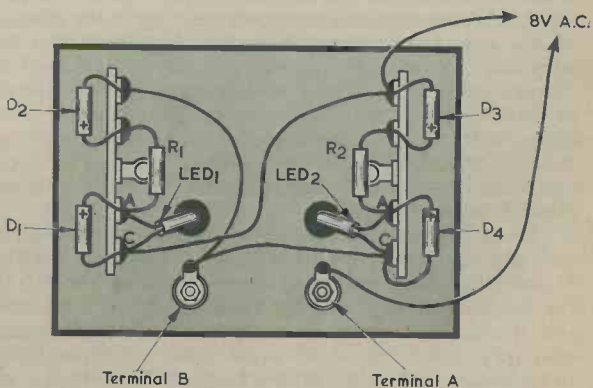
All the components apart from the mains transformer can be mounted on the rear of the front panel
